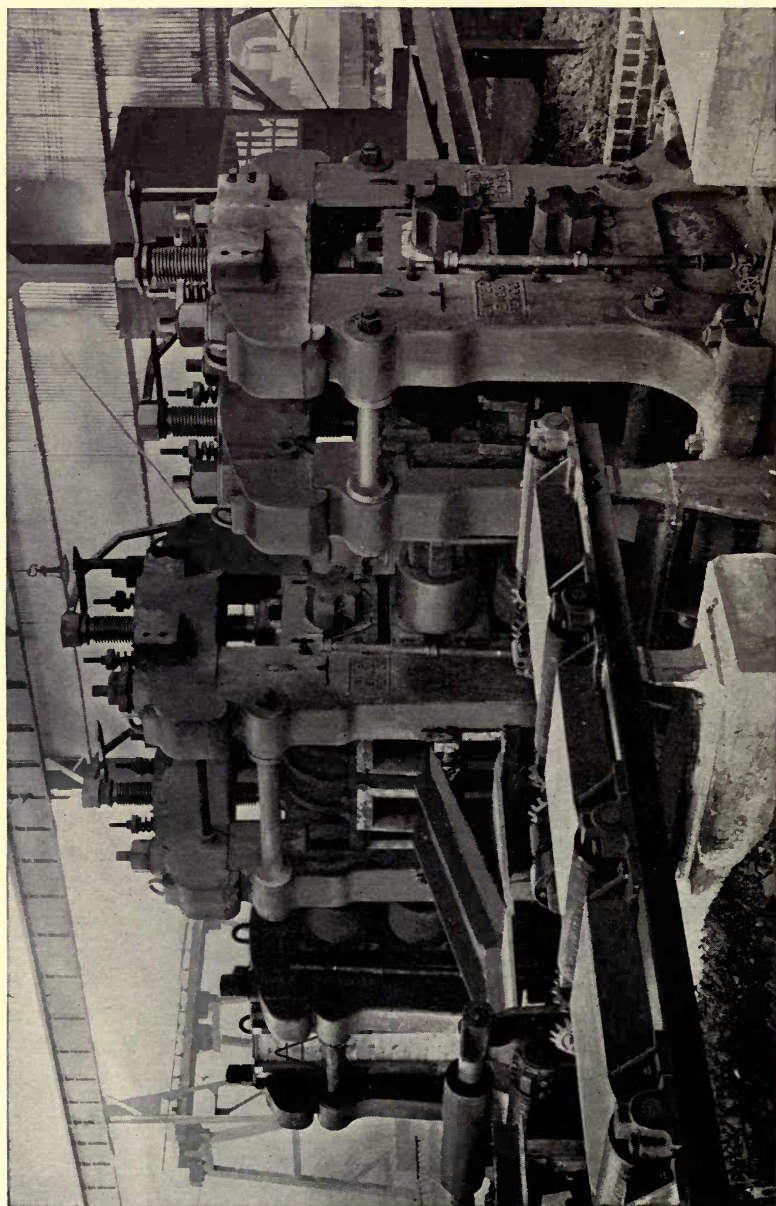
24-inch Sheet Bar Mill, Andrews Steel Co., Newport, Ky.
